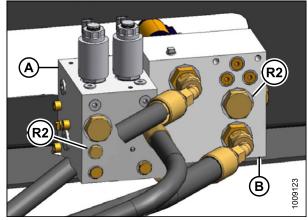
Valve Blocks without Reverser Valve in Factory Configuration
